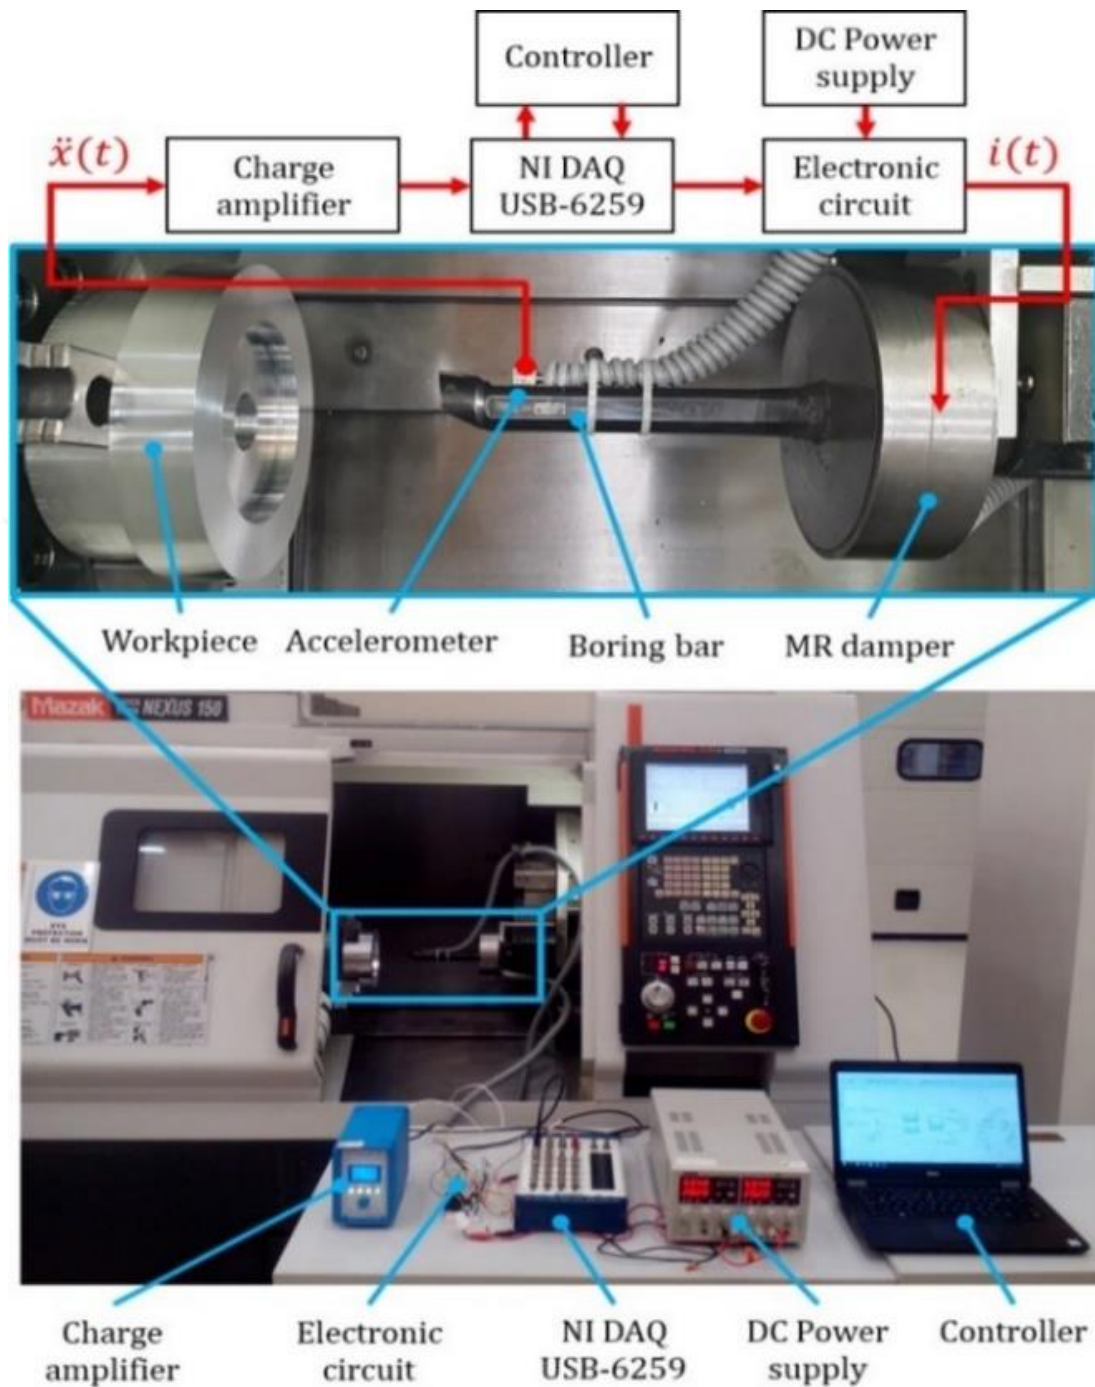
Experimental setup for the boring bar with the MR damper on the CNC turning center.
